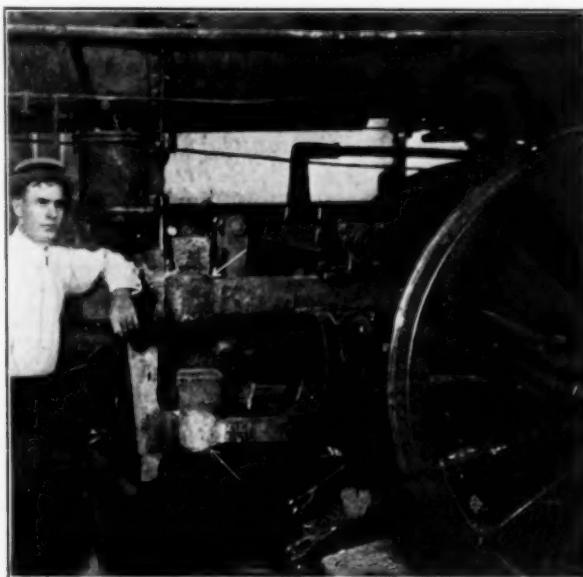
TWO FINISHED THERMIT WELDS ON A LOCOMOTIVE FRAME. REPAIR BEING EXECUTED WITH VERY LITTLE DISMANTLING OF THE LOCOMOTIVE
